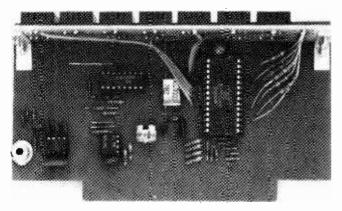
PHOTO OF TOP OF MAIN BOARD also shows the rear of the display board and the angle brackets used to join the two boards.
